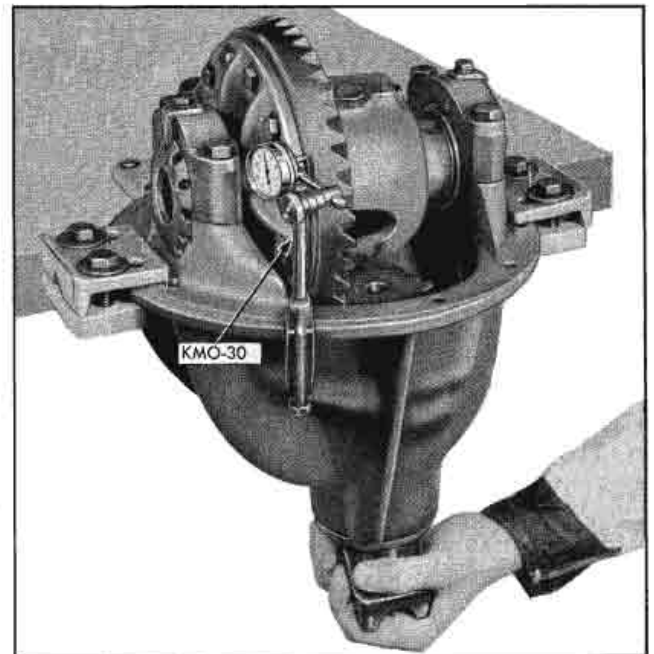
Checking Ring Gear Run-out with KMO-30 Set
